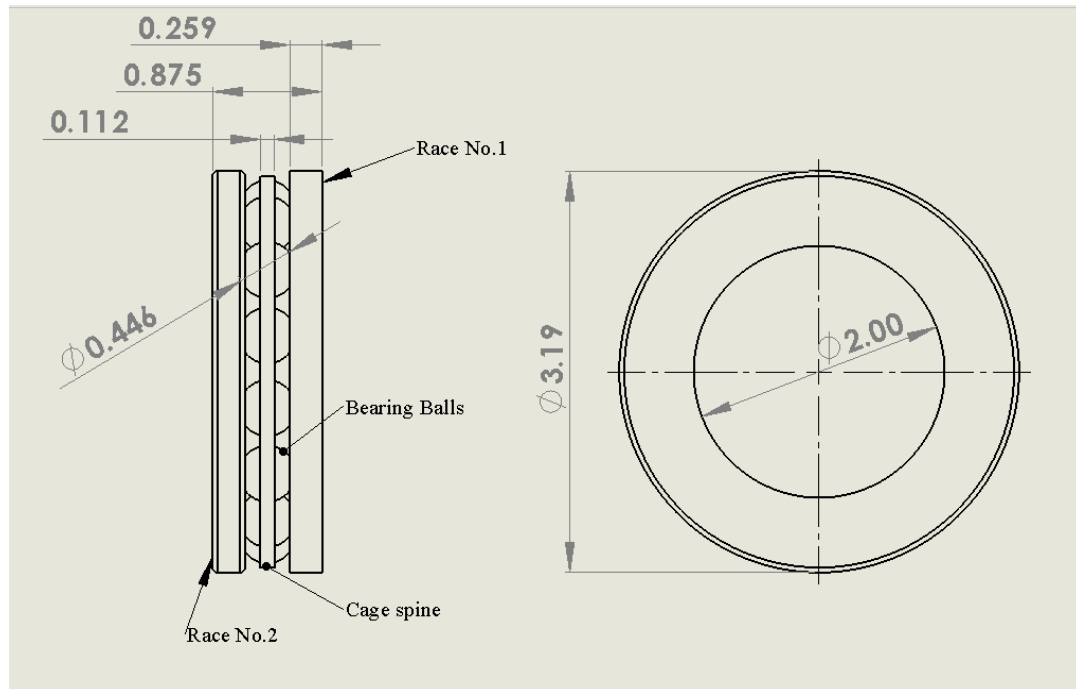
Bearing cage spine proposed configuration and dimensions
